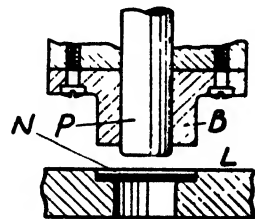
Double Action Cupping Die and Blank Holder.
